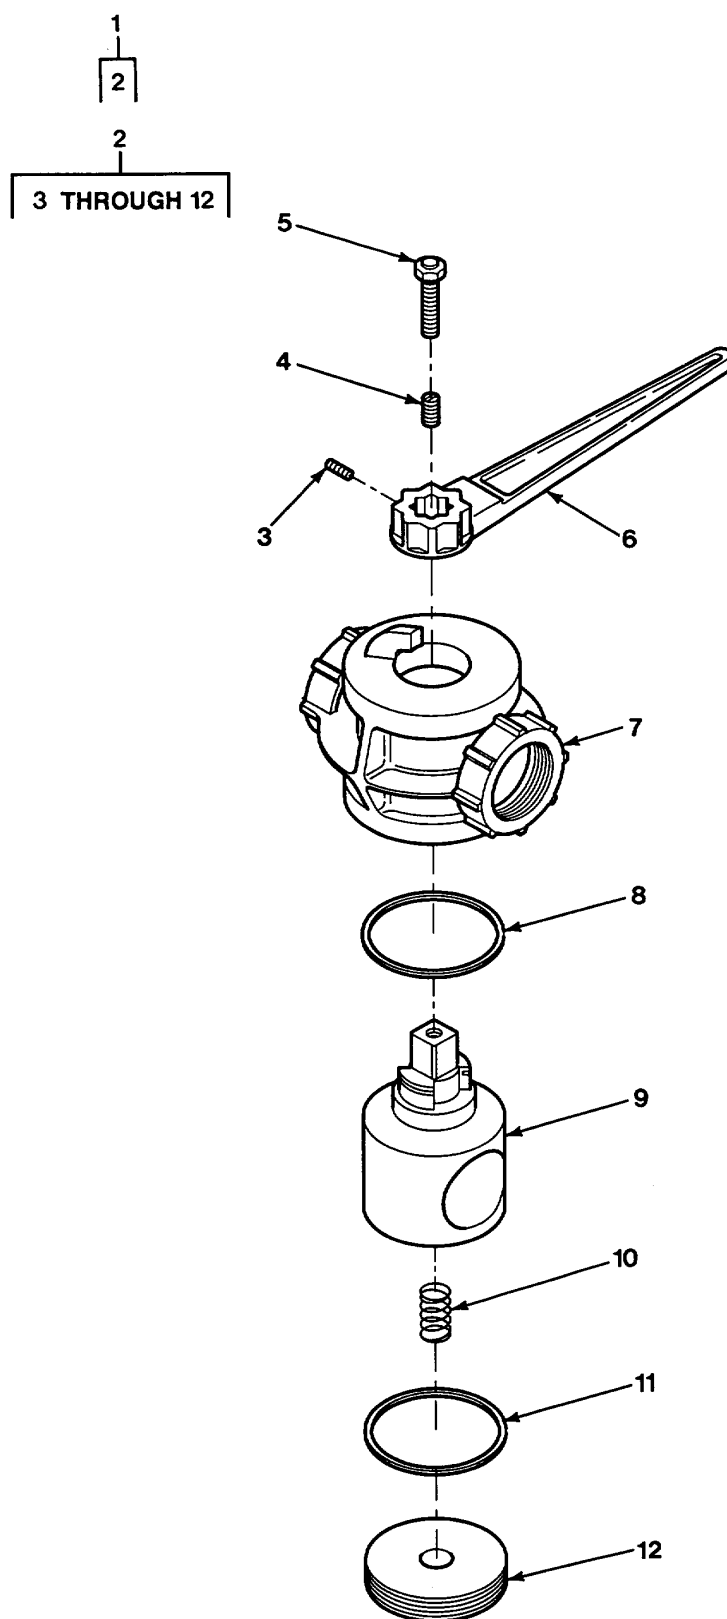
THREE INCH TWO WAY VALVE ASSEMBLY
